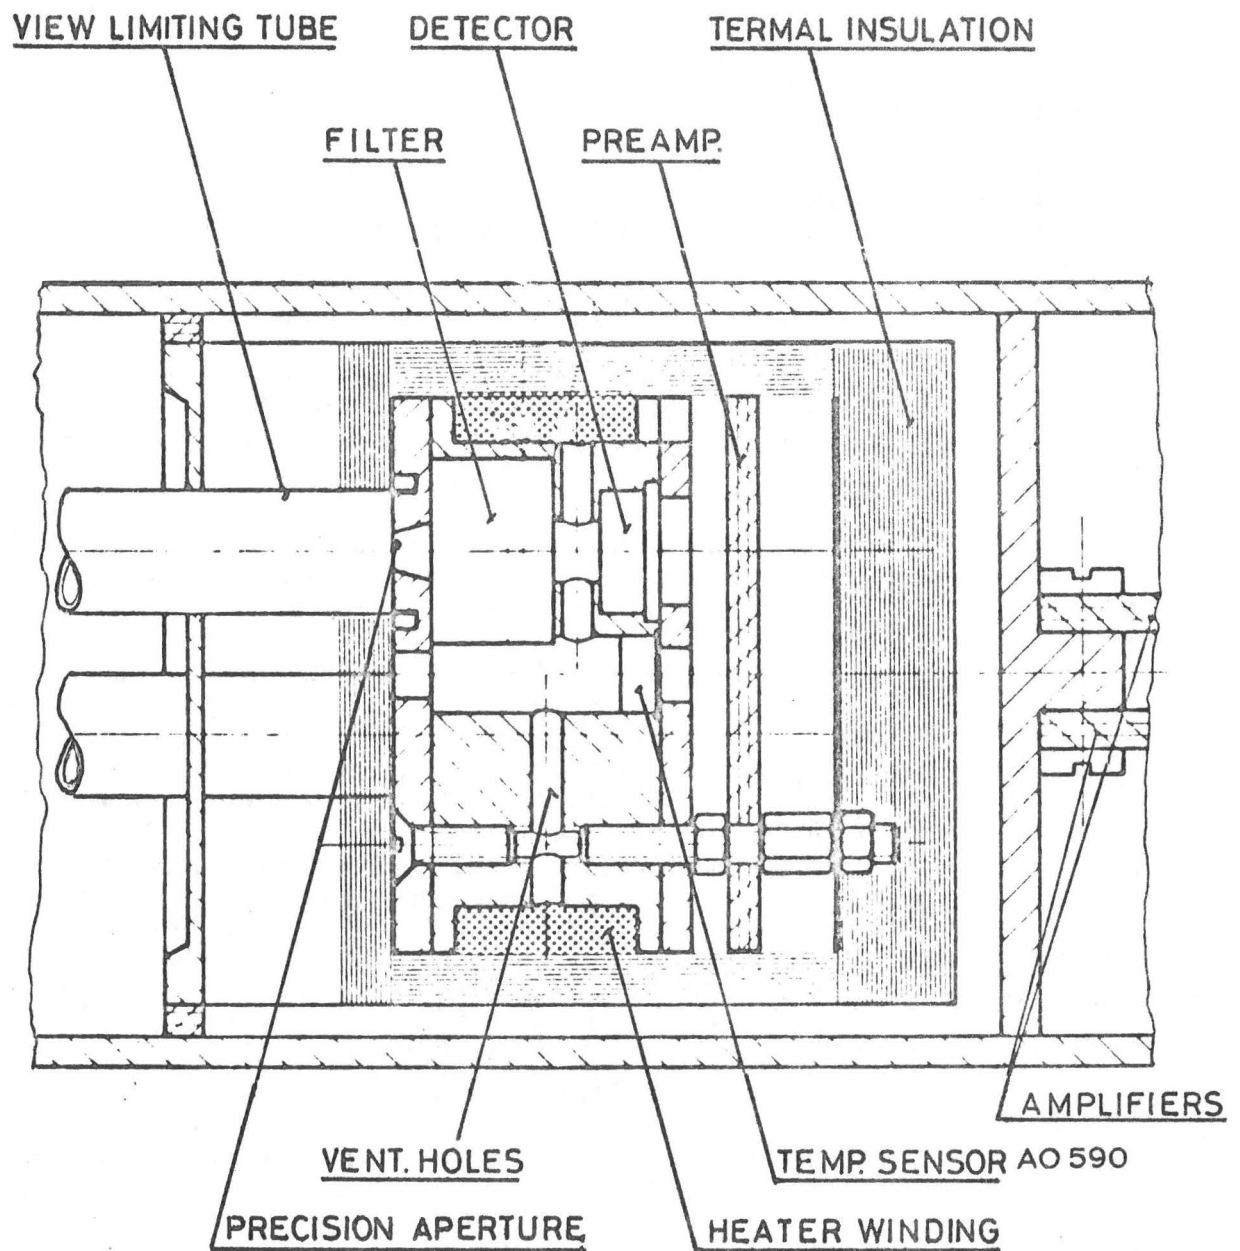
B: Schematic drawing of the detector assembly of a triple-PMOD-Sunphotometer
